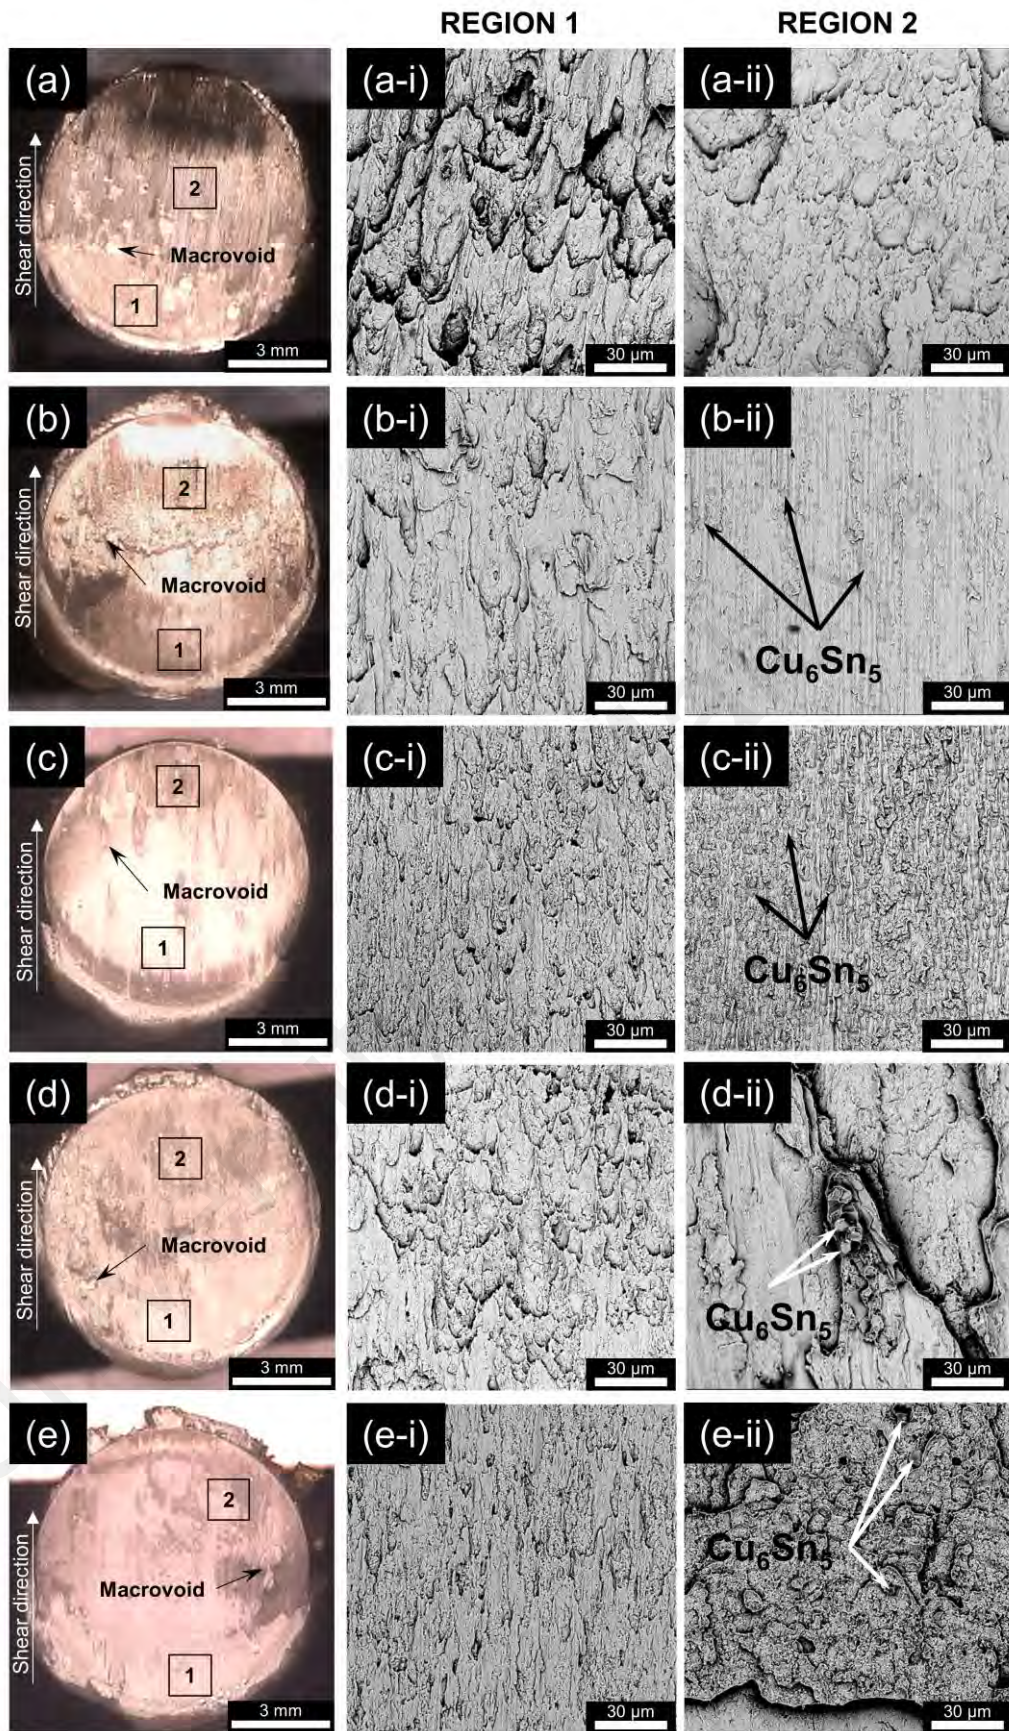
Shear-fractured surface of the Cu/SAC305/Cu solder joints soldered (a) without USV and with 10 W USV for USV time of (b) 1.5 s, (c) 3 s, (d) 4.5 s and (e) 6 s
